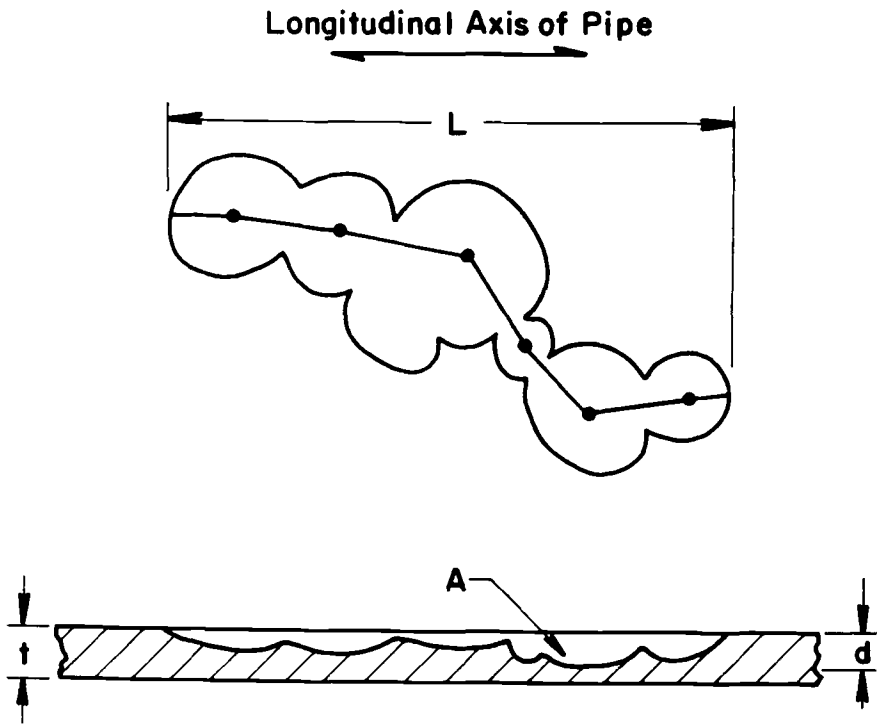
Conceptual view of a corroded axial pipe wall segment [1].
